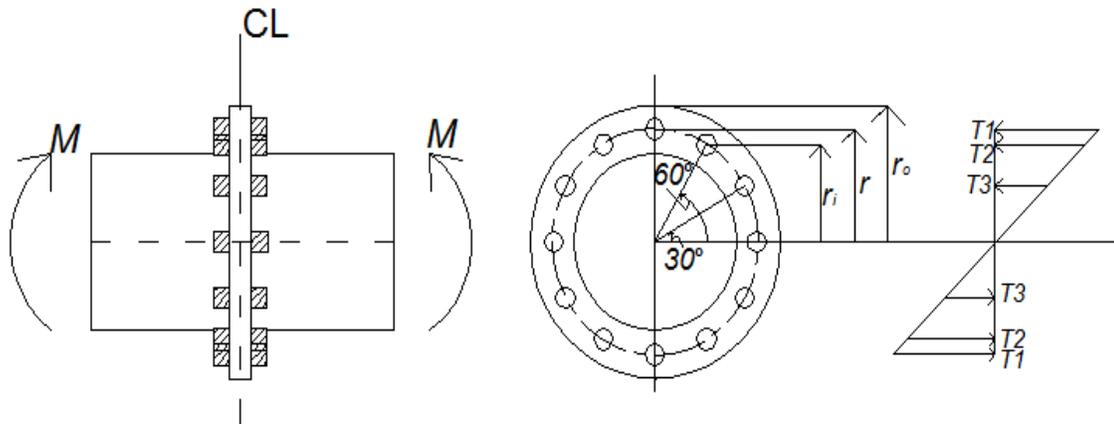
Front & plan view with force distribution of a typical flanged pipe joint with 12 bolts
